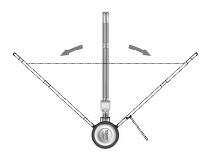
Rake and Go™ Assembly Step D Ilust 4: Paso "D" del ensamblaje de la carretilla Rake and GoMR
